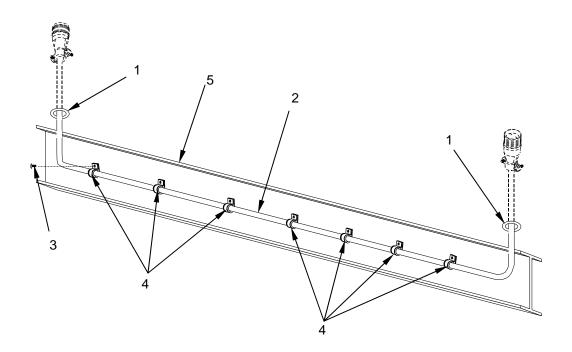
Replace a Damaged 12-ft MKT Crossway Cable.
